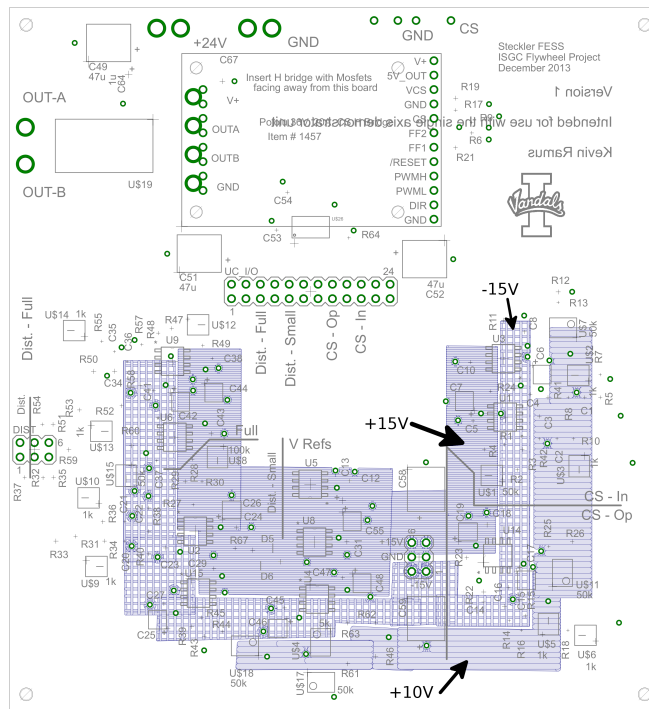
Prototype PCB Power Plane (Second) Layer - EAGLE Layout View
